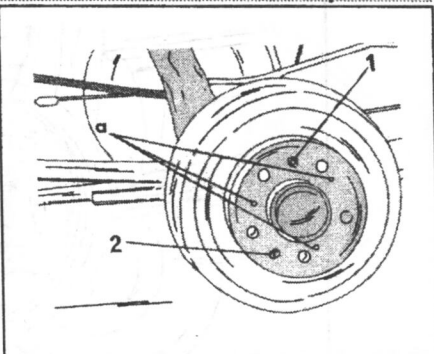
Removal of a brake drum. Remove the guide pin (1) and the securing screw (2). The extractor bolts are fitted into bores "a".
